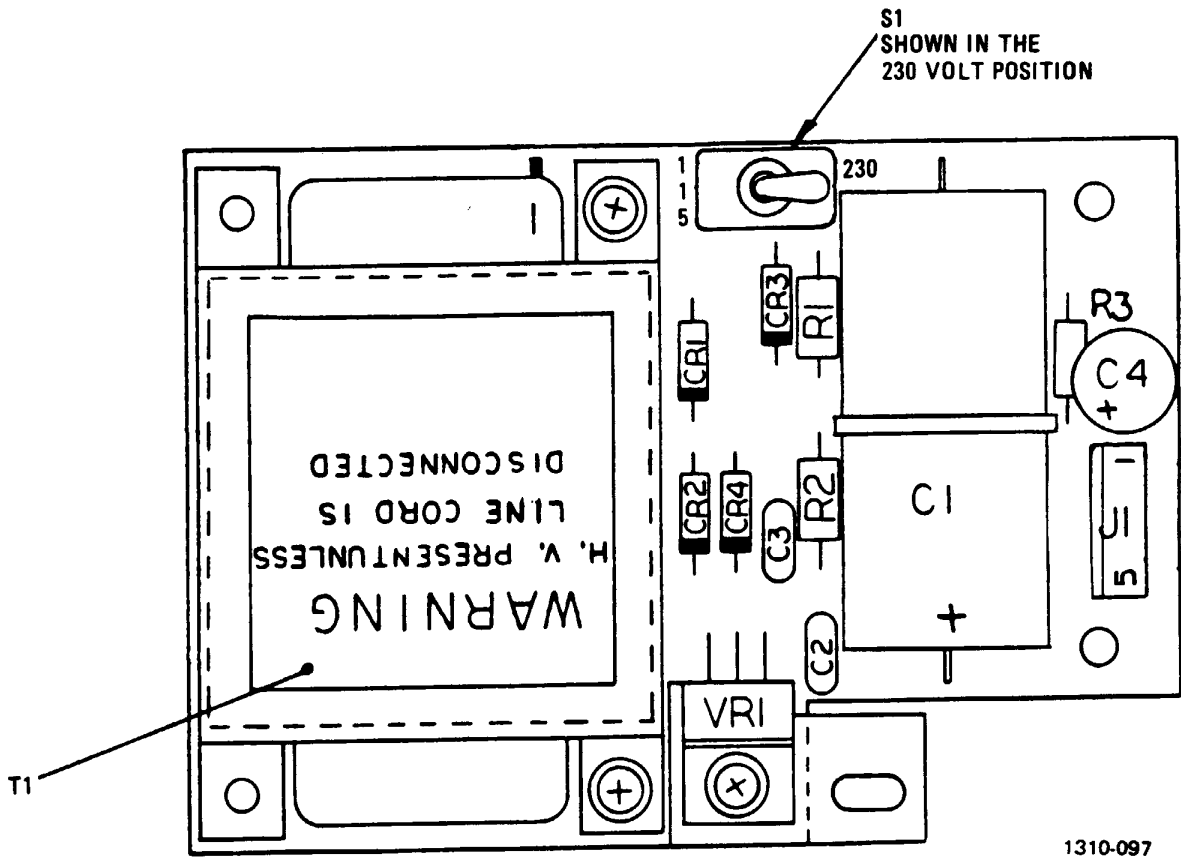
Power Supply Assembly A23 Component Location Diagram (10121-5800 Rev. E)
